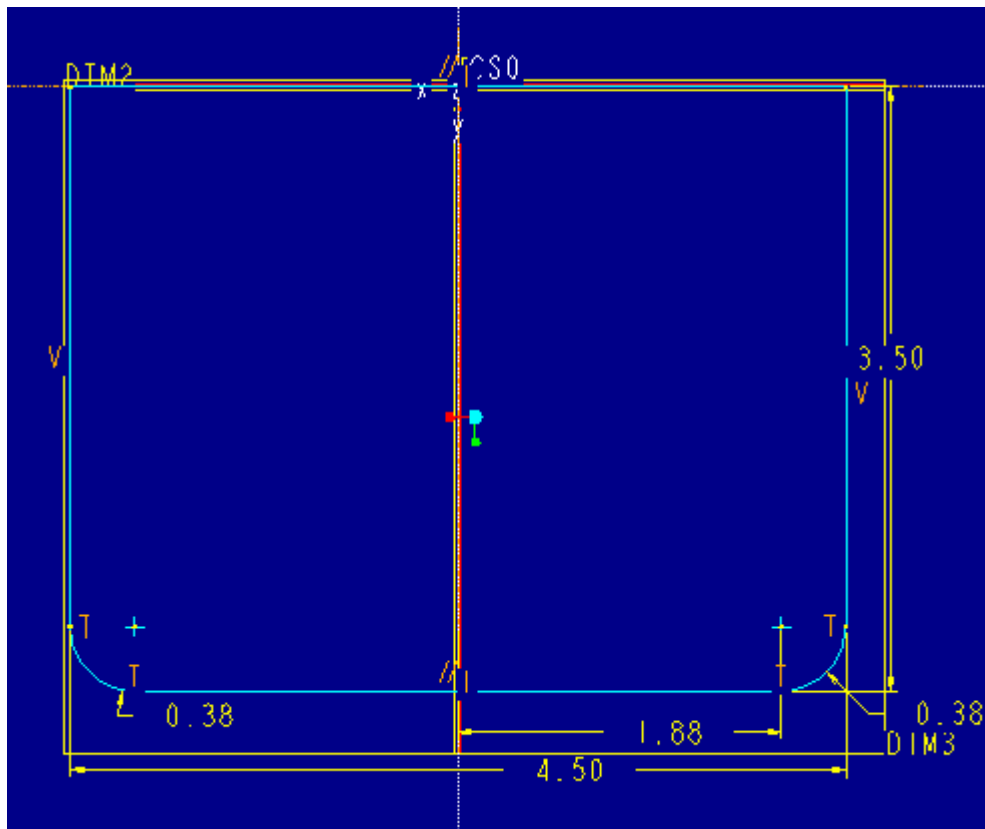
Mold Insert Cross-Section with Correct Dimensional Values.
